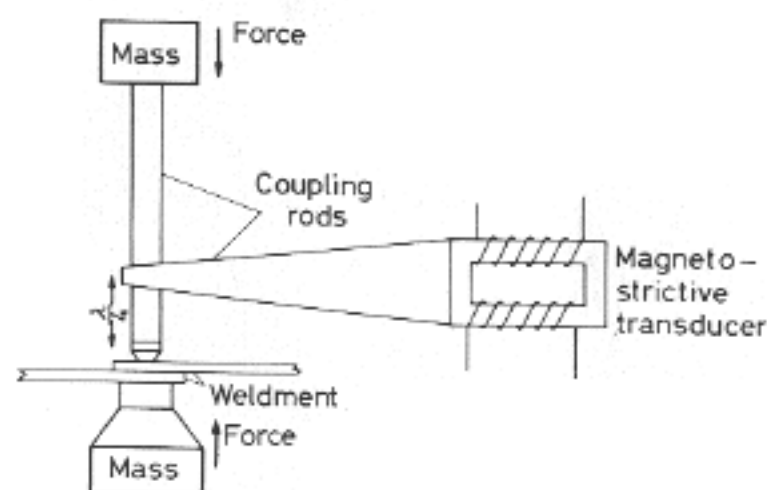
Ultrasonic welding method, after Jones and Powers⁴
